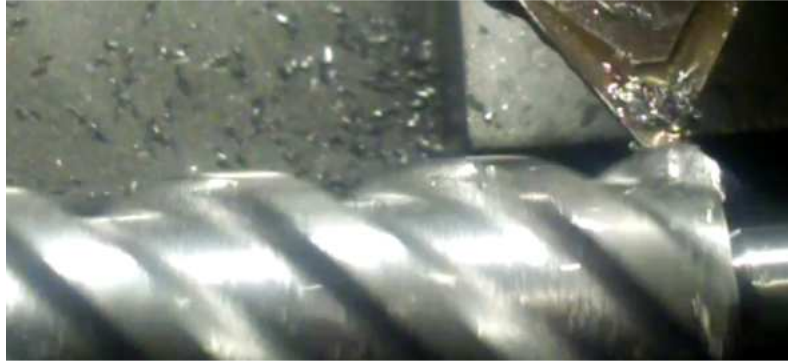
Making of last cut of machining trapezoidal thread with eccentric cutting
